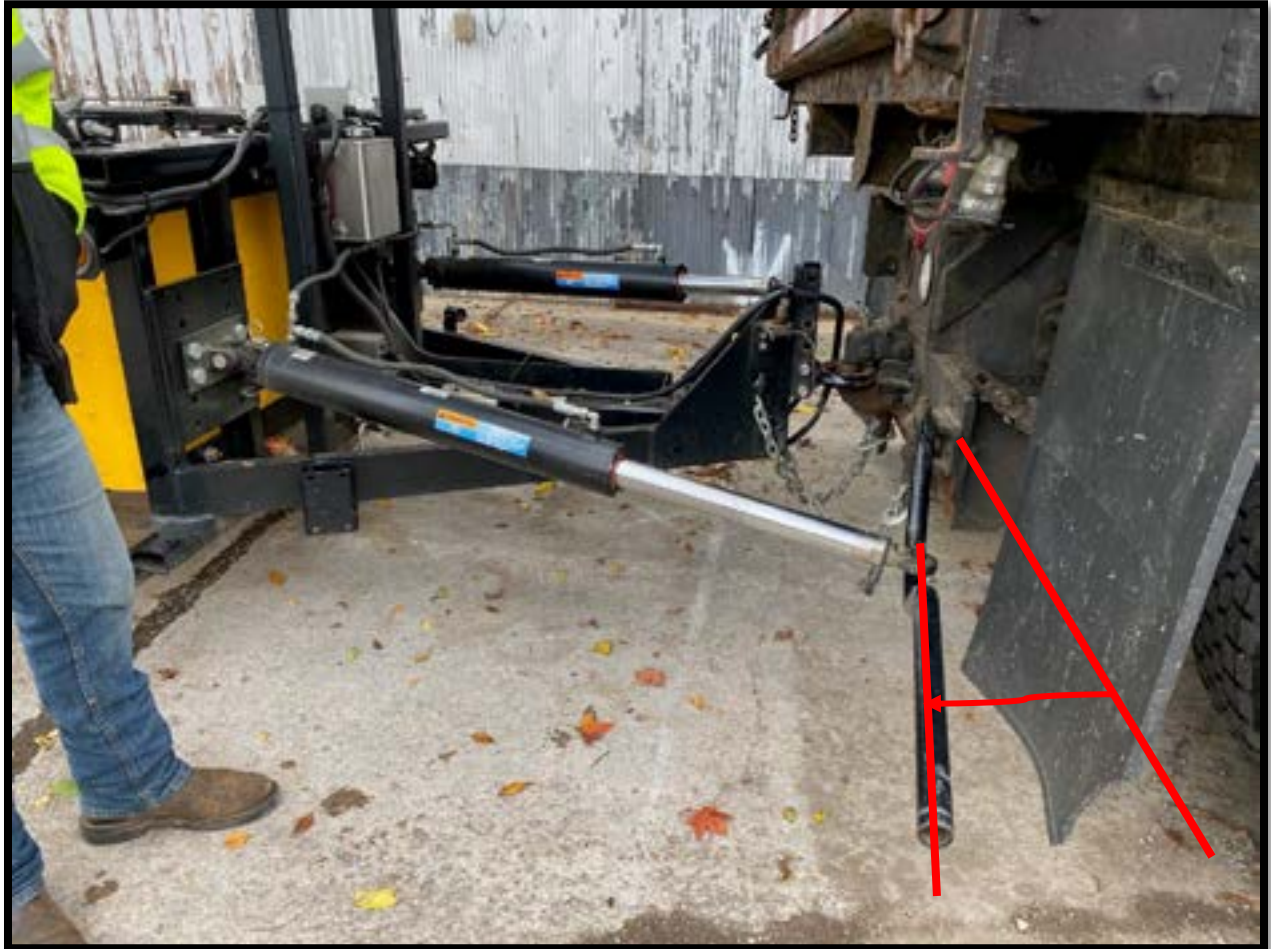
Photo H – Utilize tool to aid in alignment of the pin connection of the cylinder end to the truck-mounted bracket. Secure with pins.
